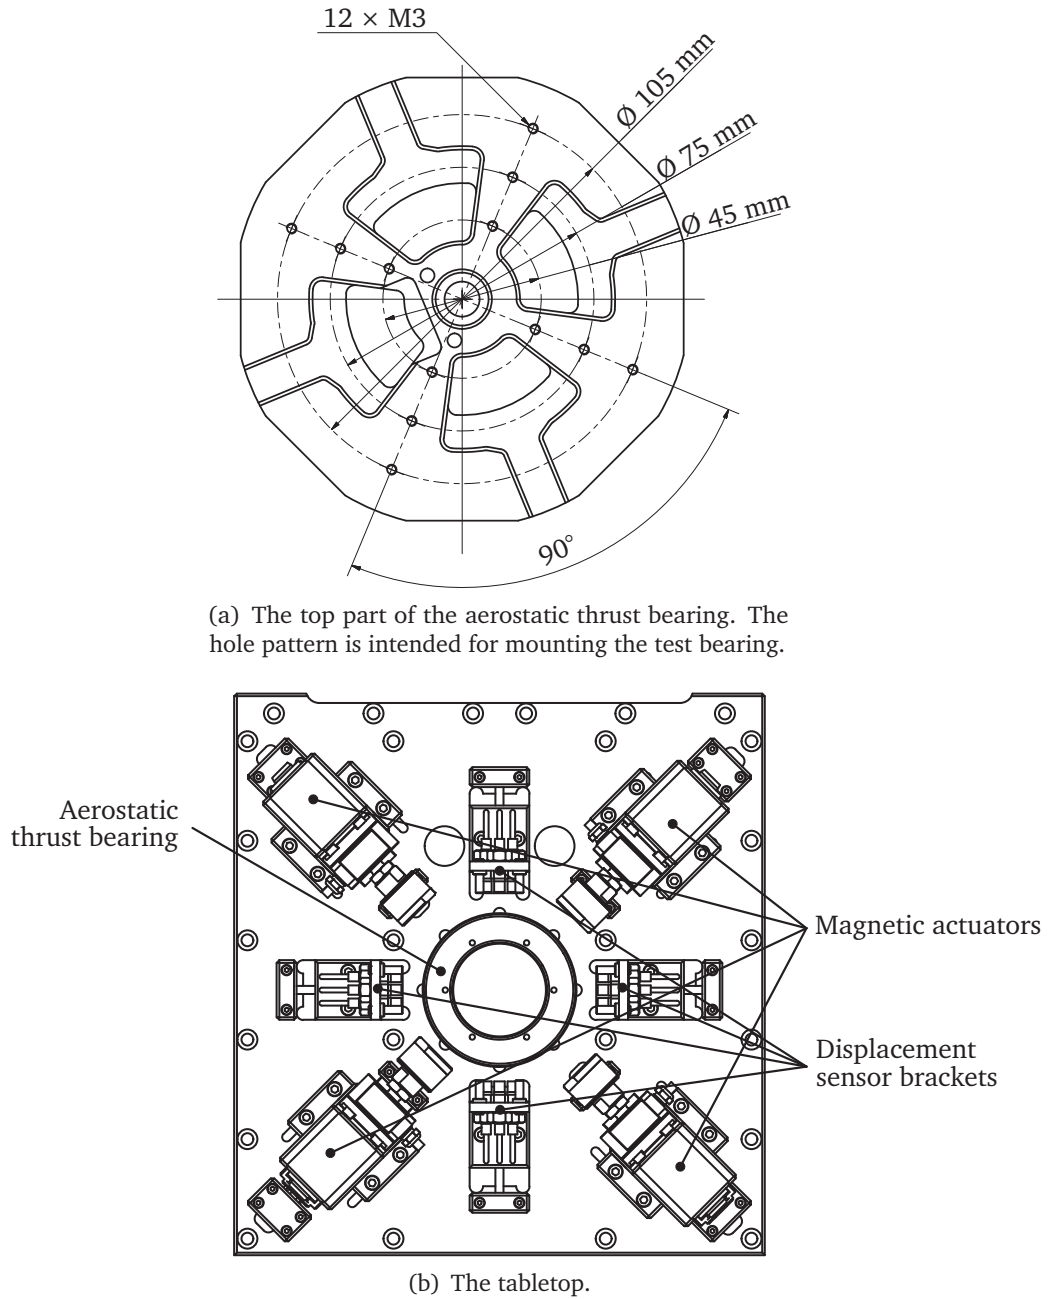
Two of the key components in module 1, the top part of the aerostatic thrust bearing and the tabletop. Magnetic actuators and eddy current displacement sensors are located on top of the tabletop. These parts are key components of module 3.
